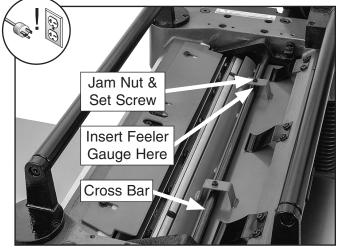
Feeler gauge location for adjusting chip breaker height when using wood blocks.
